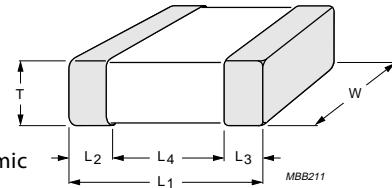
Surface mounted multilayer ceramic capacitor dimension
